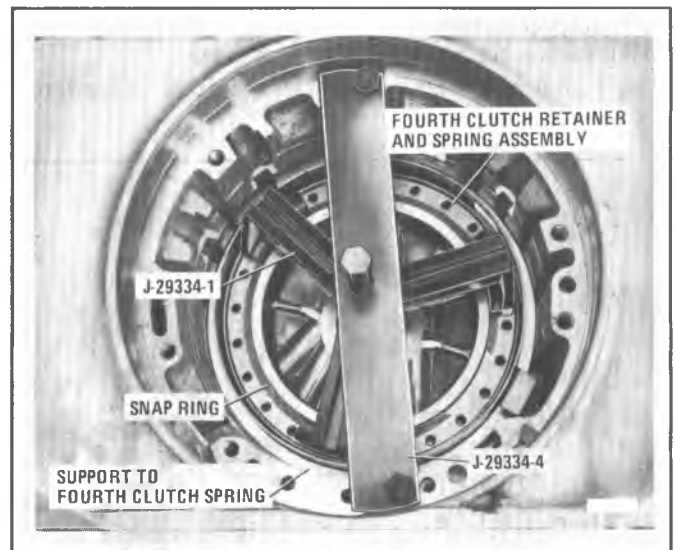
A6-166 Installing Tools on Fourth Clutch Spring Assembly and Case
